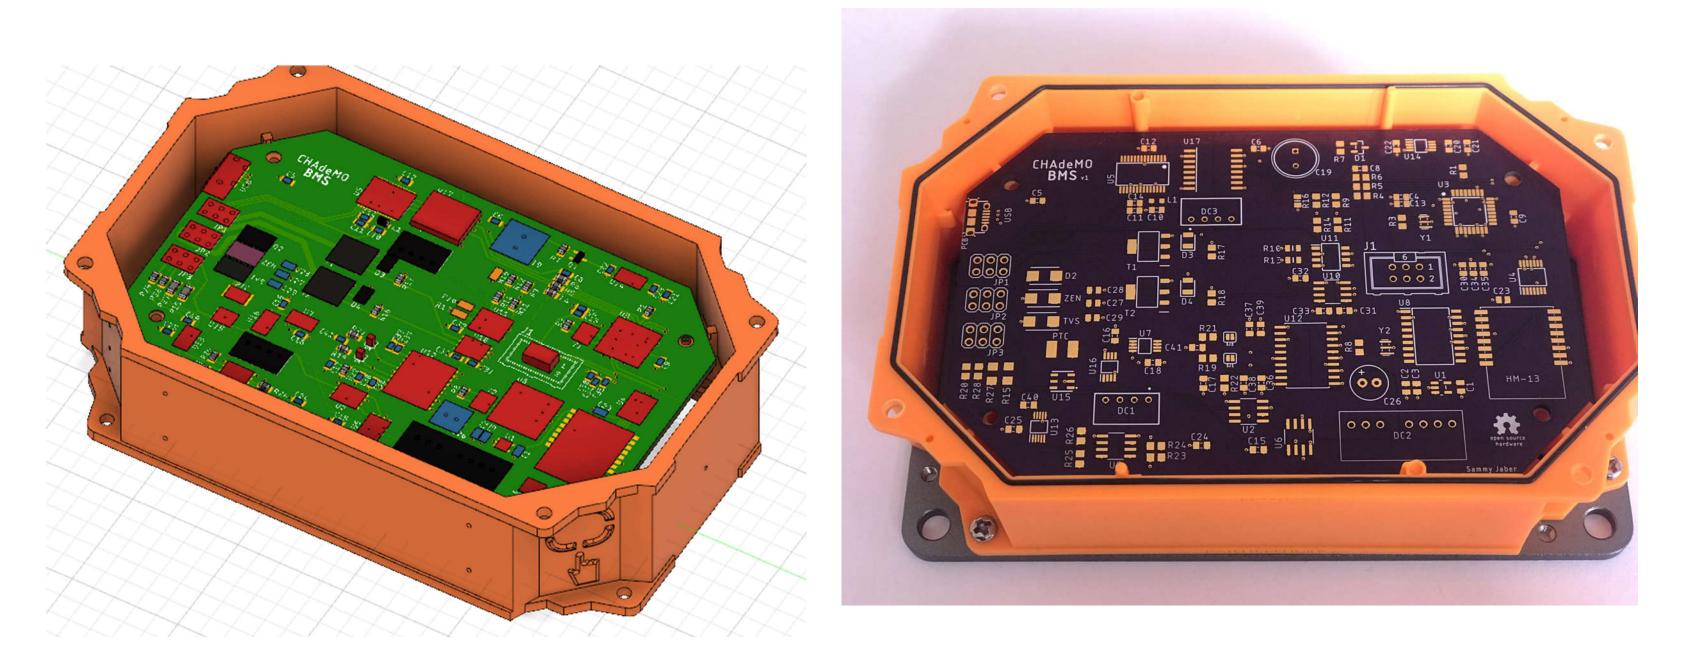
Use of Autodesk Fusion360 software to specify mounting holes, enabling the PCB to fit within an IP67 rated enclosure.
